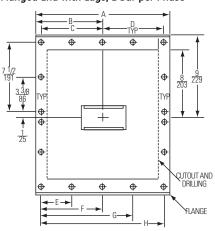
Flanged End with Lugs, 2 Bars per Phase
